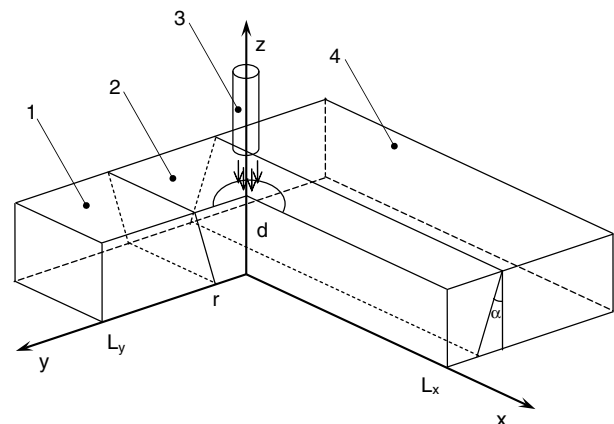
Welding layout. 1, 4, Metal plates; 2, powder; 3, laser beam.
